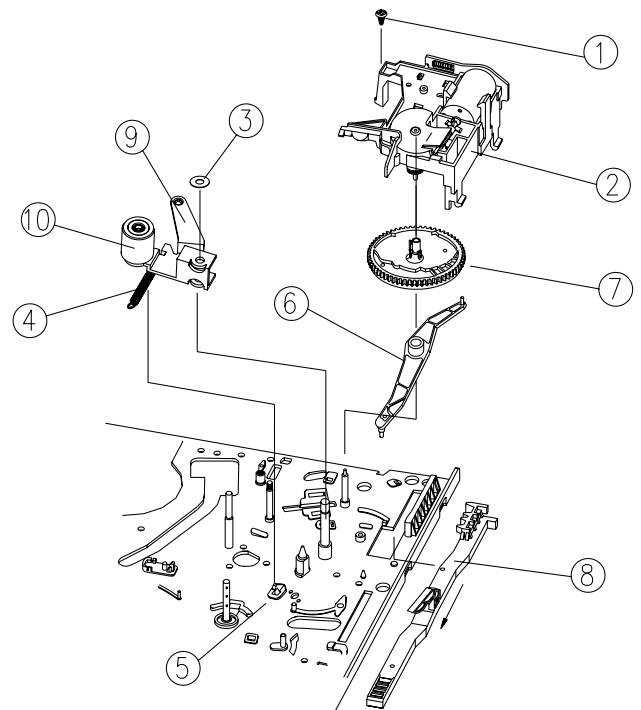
L/C BRKT, PINCH LEVER, CAM GEAR, RELAY LEVER, F/L RACK REMOVAL
